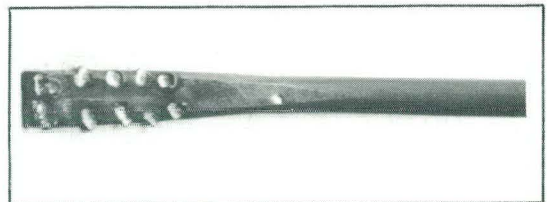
A 0.062-inch thermocouple resistance-welded to a 0.030-inch plate.
